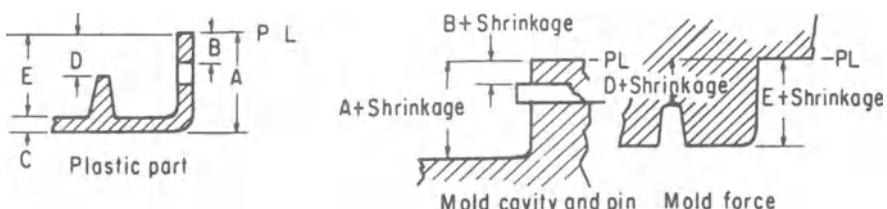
Dimensions and tolerances given for parting lines should include allowances for potential flashing conditions. All molds for TPs or TSs can open and flash to some extent, depending on the mold design and construction, melt pressure, mold-clamping force, and type of material. For example, if the flash is 0.003 in. (0.008 cm) at the mold parting lines, part dimensions A, B, C, D, and E will increase 0.003 in. (left diagram). The drawing at the right shows how to estimate mold components.
